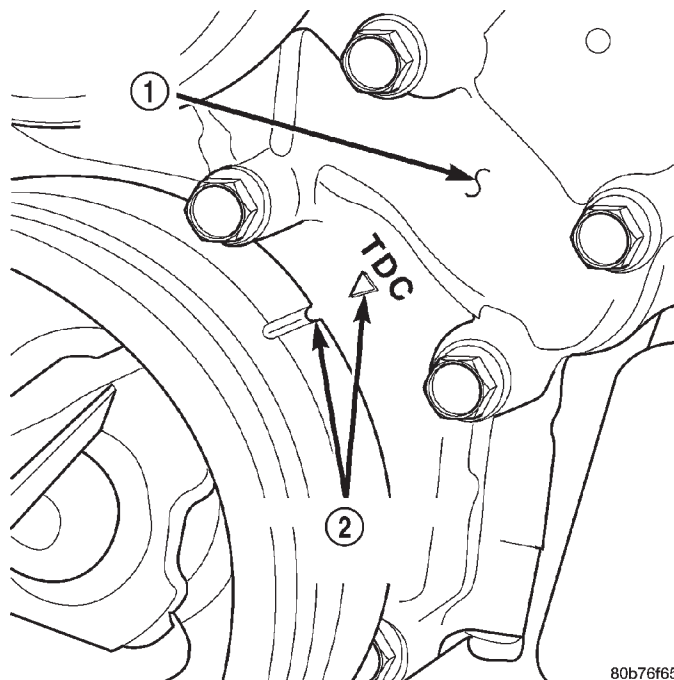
Engine Top Dead Center (TDC) Indicator Mark
